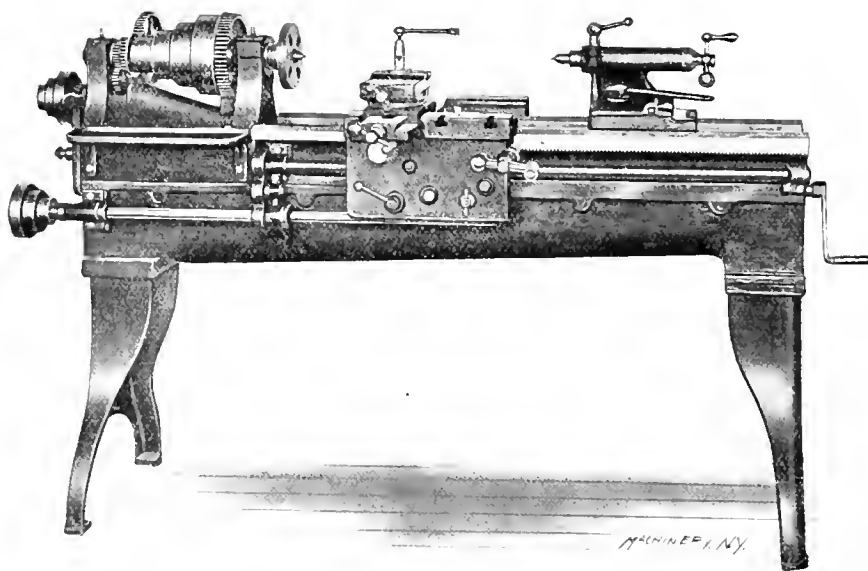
The Barnes Sliding Extension Gap Lathe.
